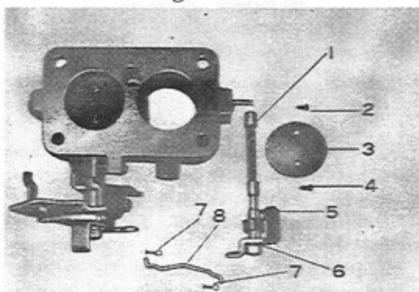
Disassembling 01913 Secondary Throttle Valves
